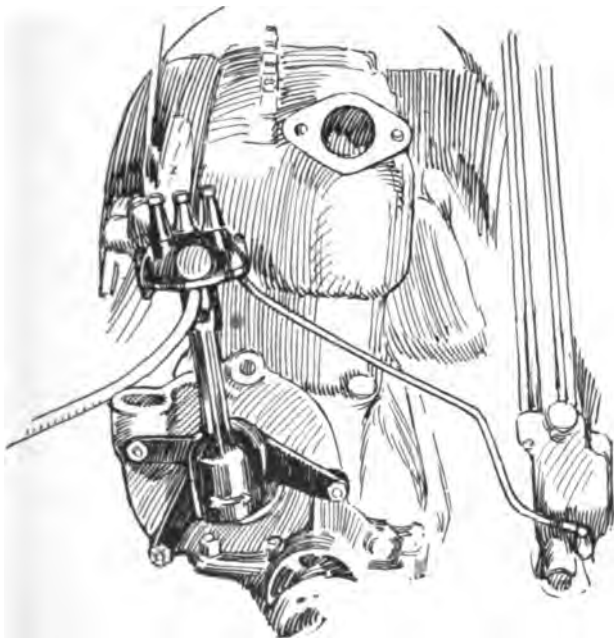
Type H Atwater Kent Unisparker bolted in place on Ford engine
